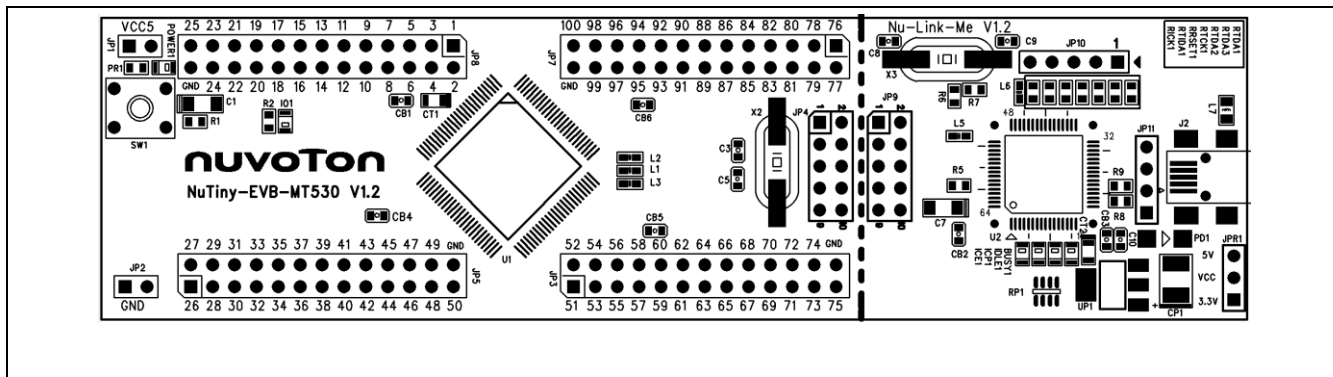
NuTiny-EVB-NM1530 PCB Placement
